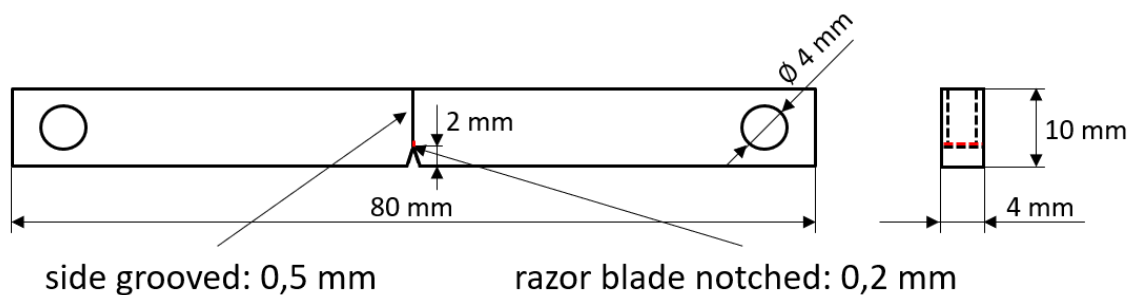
Charpy test specimen dimensions with additional drill holes for mounting in Hoop-Stress Device, side grooves and razor blade notch.
